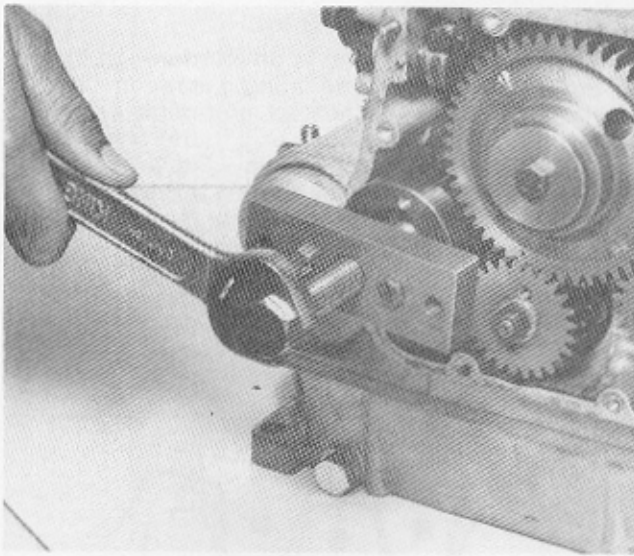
Crankshaft Gearwheel Removal Using Gearwheel Puller
